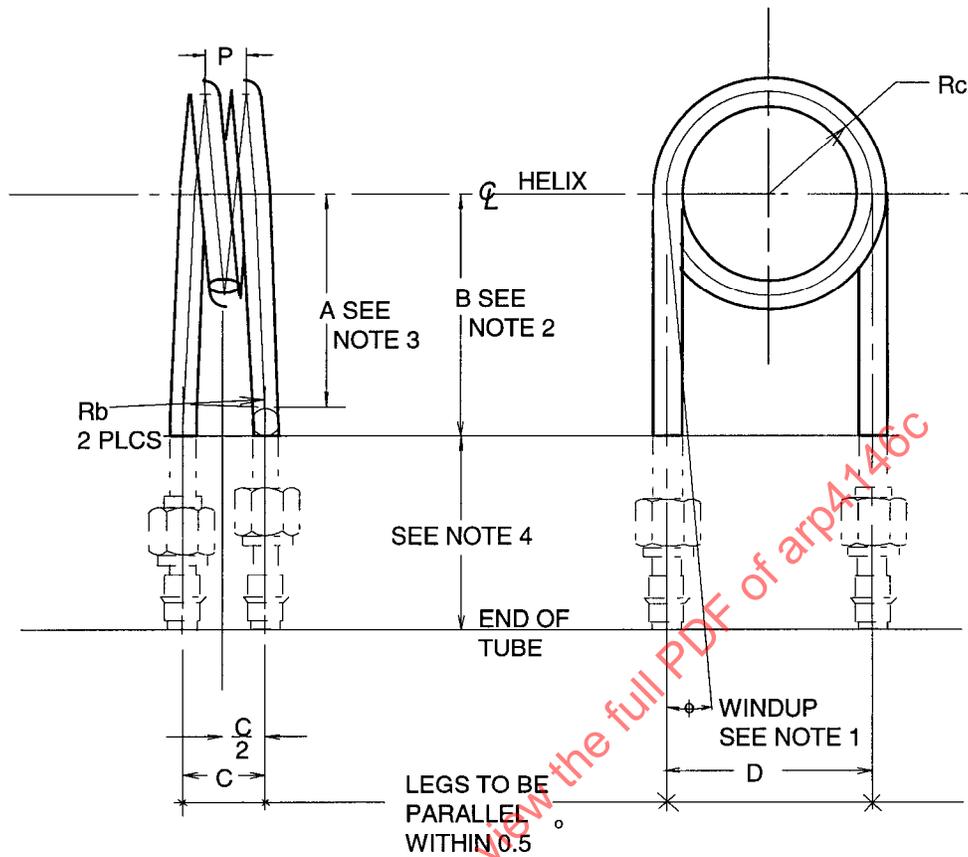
STYLE A DESIGN DIMENSIONS
